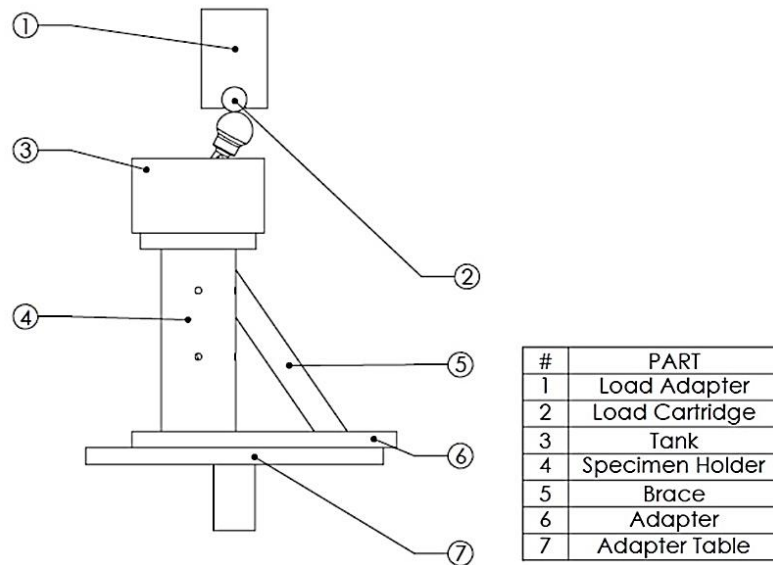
Test setup for a straight implant (no version) under mechanical tests [52].
